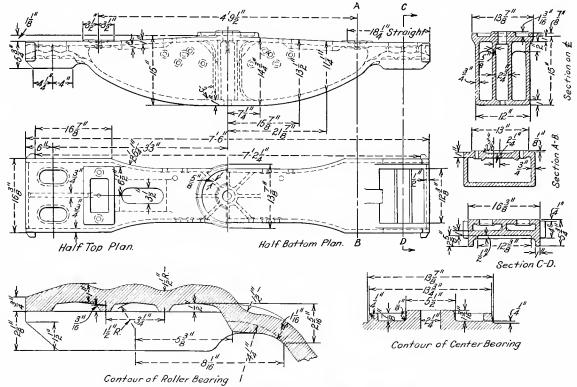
Cast Steel Truck Bolster for Baltimore & Ohio 70-Ton Capacity Freight Cars. Buckeye Steel Castings Company.
